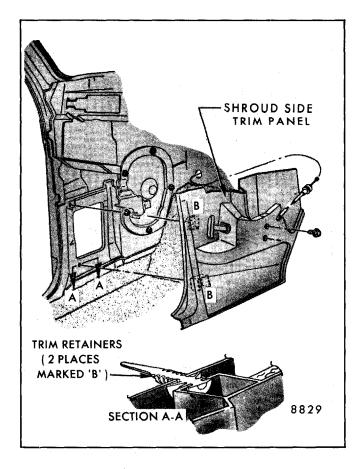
Shroud Side Trim Panel (Left Side)
